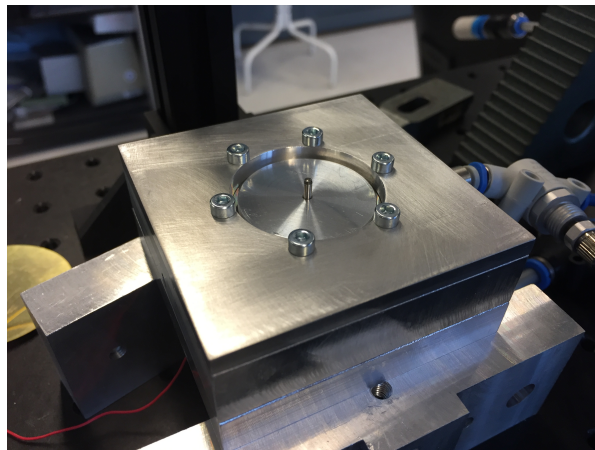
Assembly of the pneumatic actuator, with aligning pin for fitting measurement components. The aligning pin can prevent the components from slipping and it will make sure the components will receive a vertical force, preventing the membrane from twisting
